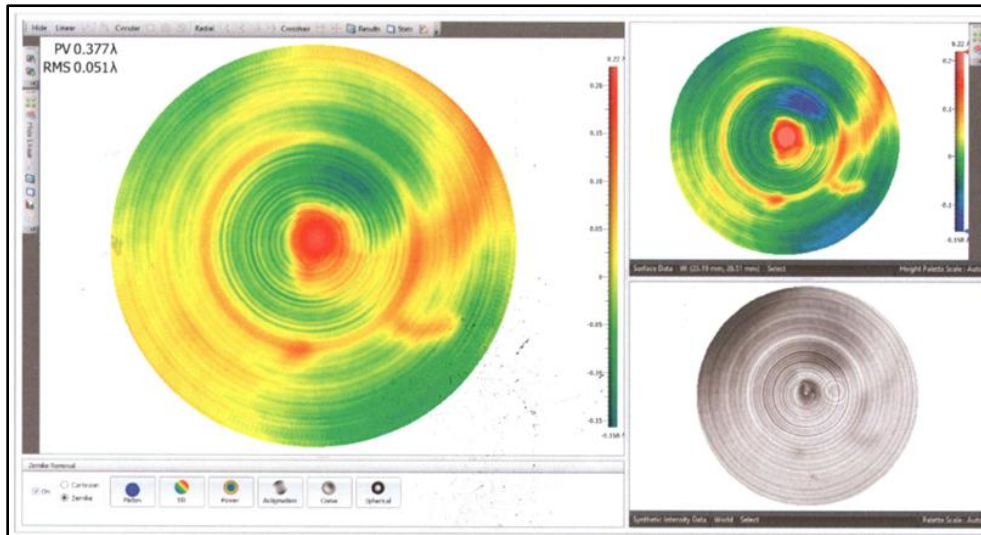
spherical surface of molded optical element as seen by ZYGO Interferometer
